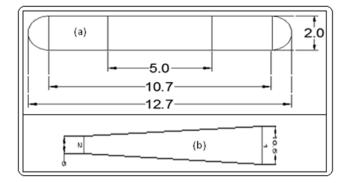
(a) Tube and (b) Nozzle dimensions of proposed radiator
